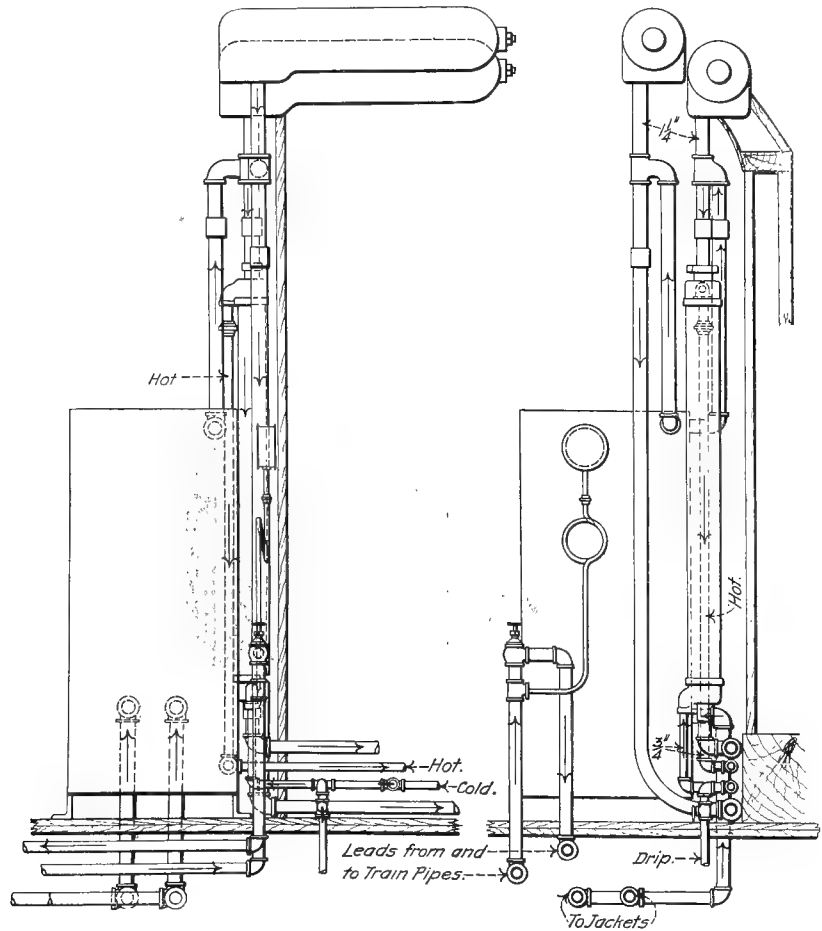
Hot and Cold Water Connections to Baker Heater in Pullman Drawing Room Sleeping Car.
